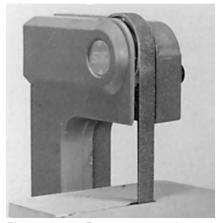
To save wear and tear on your abrasive belts and idler drum when sanding a lot of concave curves, mount a drum sander on the belt sander auxiliary spindle. The worktable and worktable extension provide support.
